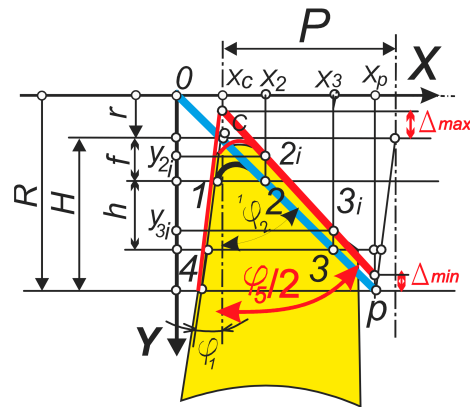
Cutting edge model of a 7°/45° buttress thread-turning tool.
